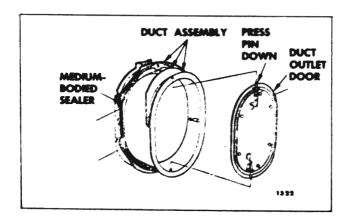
Shroud Side Air Outlet Duct Assembly and Sealing
